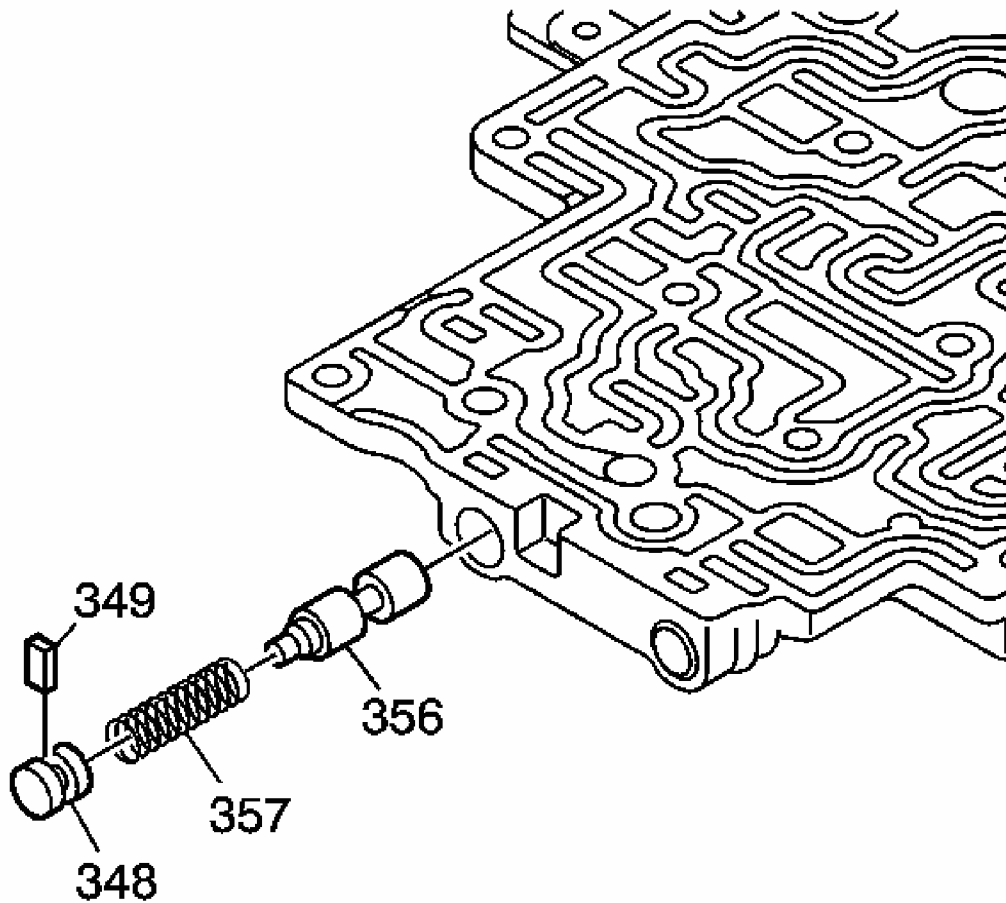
Exploded View Of Neutral Relay Valve Assembly
